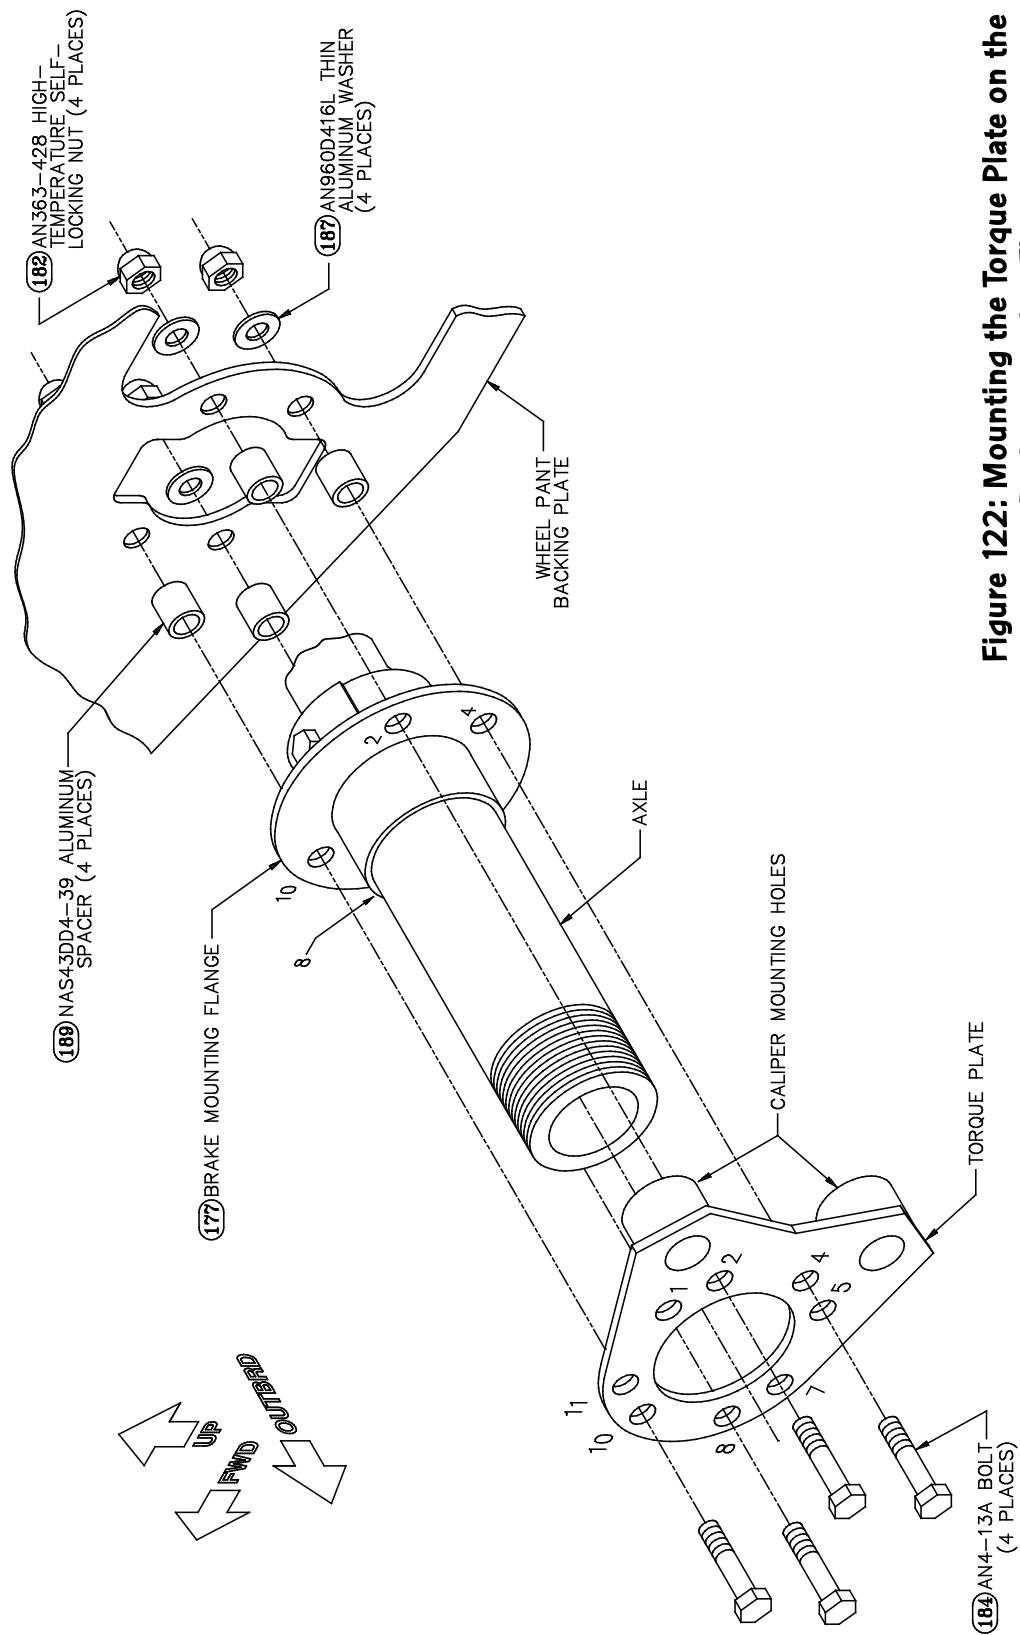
Mounting the Torque Plate on the Brake Mounting Flange
